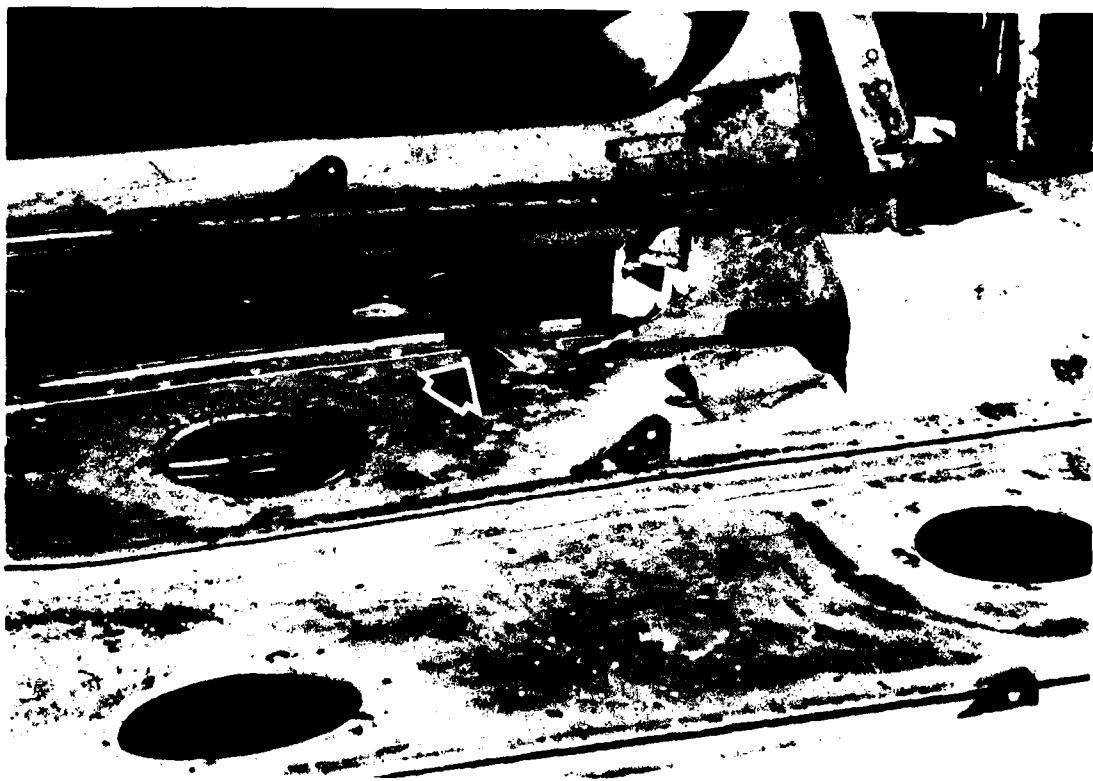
FAILURE OF THE INNER LAP STRAP ANCHORAGE (9.2kN) – AIRCRAFT 'C'
